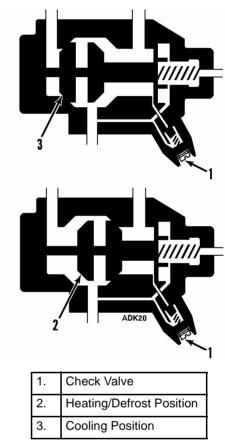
Three-way Valve Condenser Pressure Bypass Check Valve
